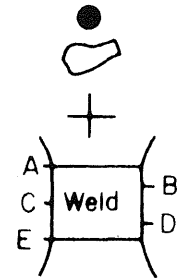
FRACTURE SURFACE, AND ULTRASONIC INDICATIONS RECORDED FOR SPECIMEN ND-47
